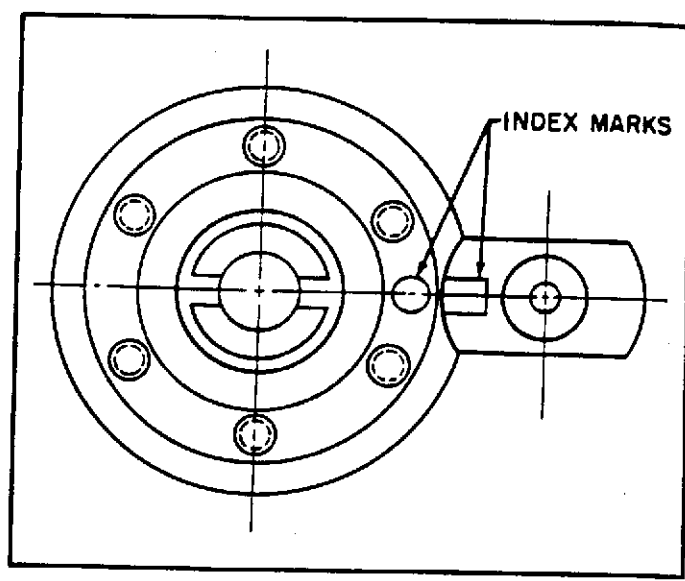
Figure Q. Alinement of Counter Gear and Shuttle Shaft
